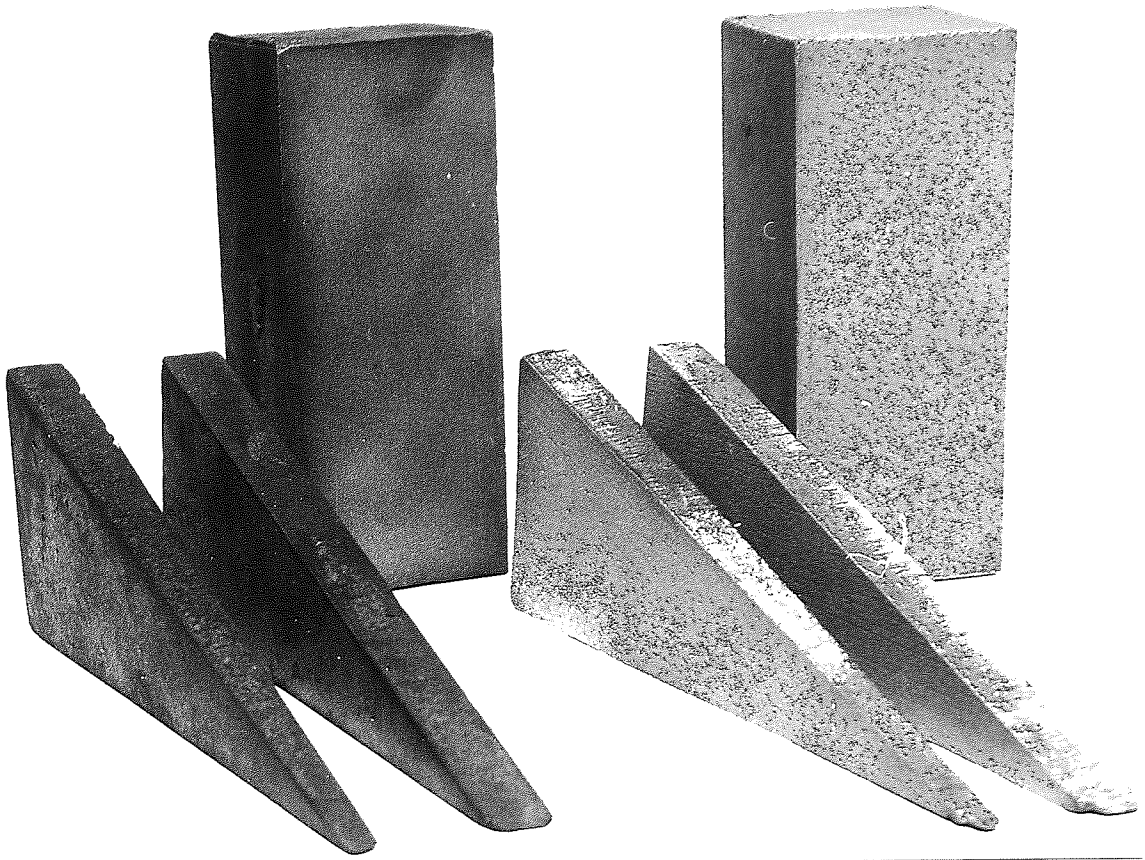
Illustrating Series I chilling techniques, from left to right; Cast Iron double taper chill, single taper chill and block chill; similarly in Aluminium.
